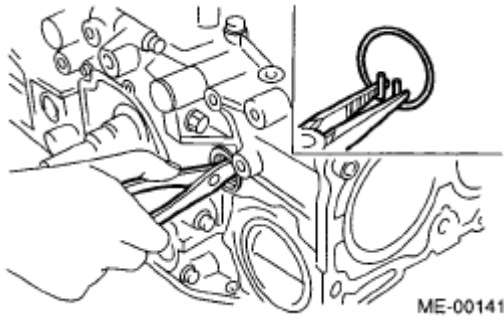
Removing Piston Snap Ring Through Service Hole Of #1 And #2 Cylinders
